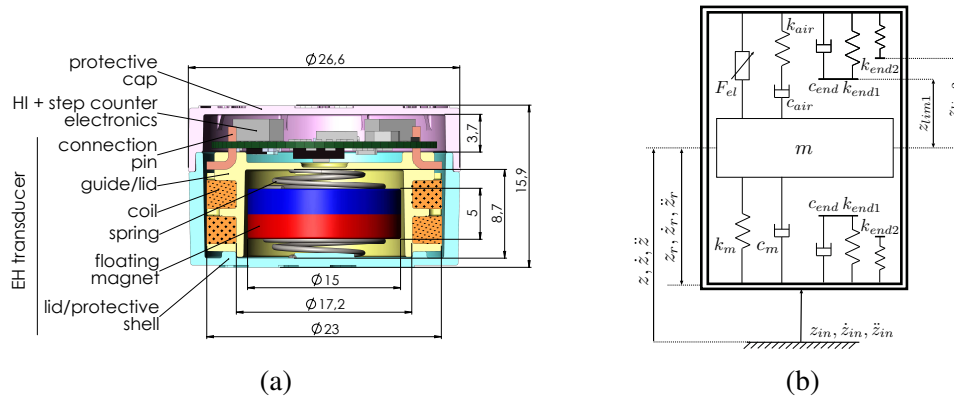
EH Bluetooth step-counter layout: main components and dimensions in mm.
